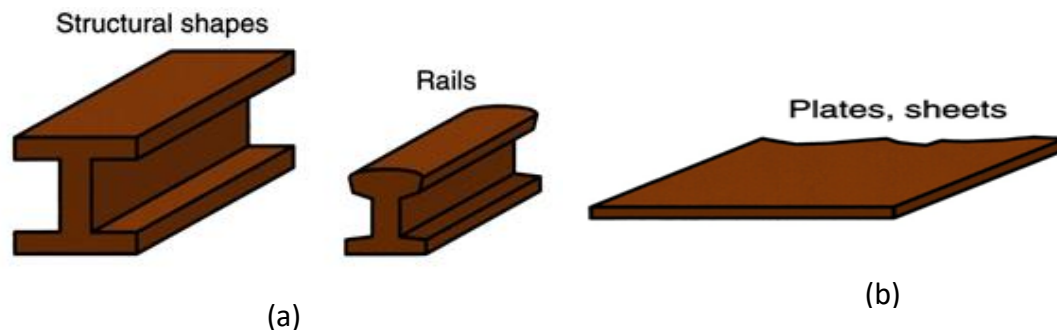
Samples of (a) shape and (b) sheet or plate metal rolling [11]
